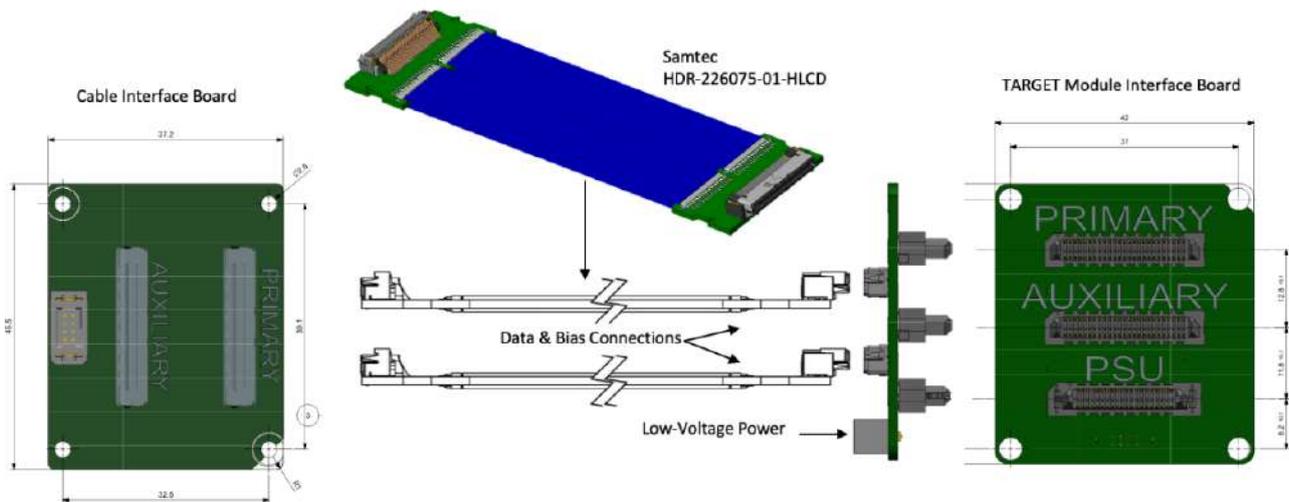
FPE Cable Interface Board, Cables and TARGET Module Interface Board.
